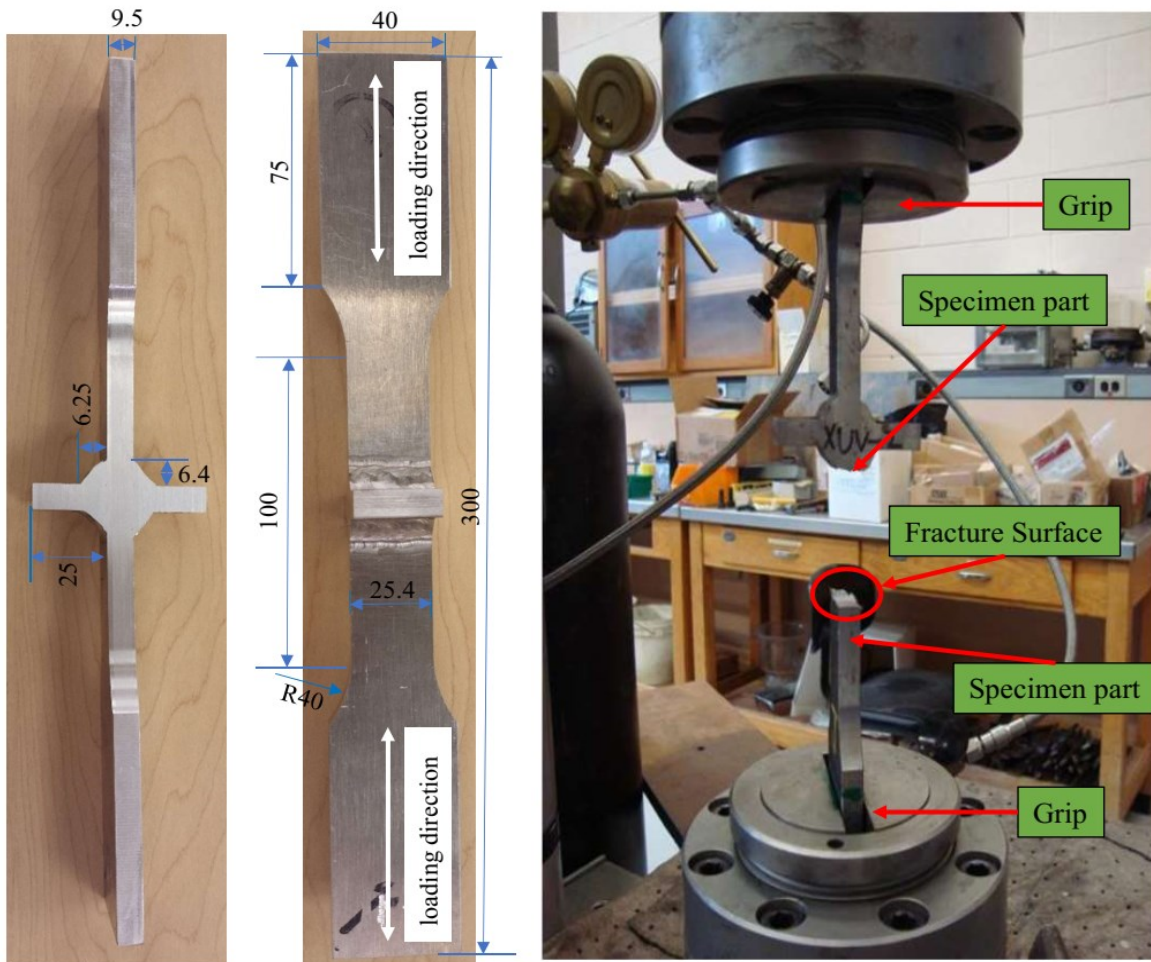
Component geometry (left), fatigue test frame (right), all dimensions in mm
